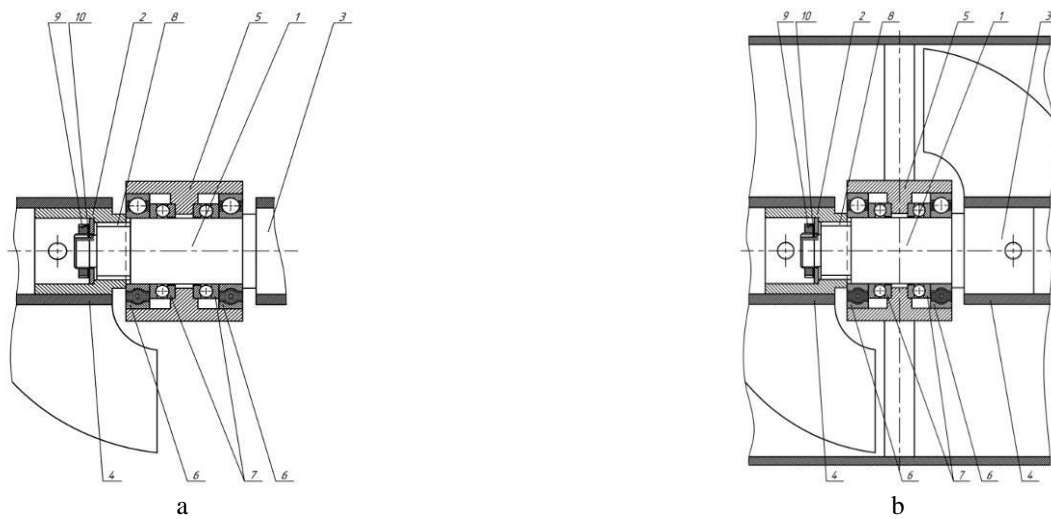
New bearing units: (a) drilling lock unit; (b) sectional drilling tool unit
